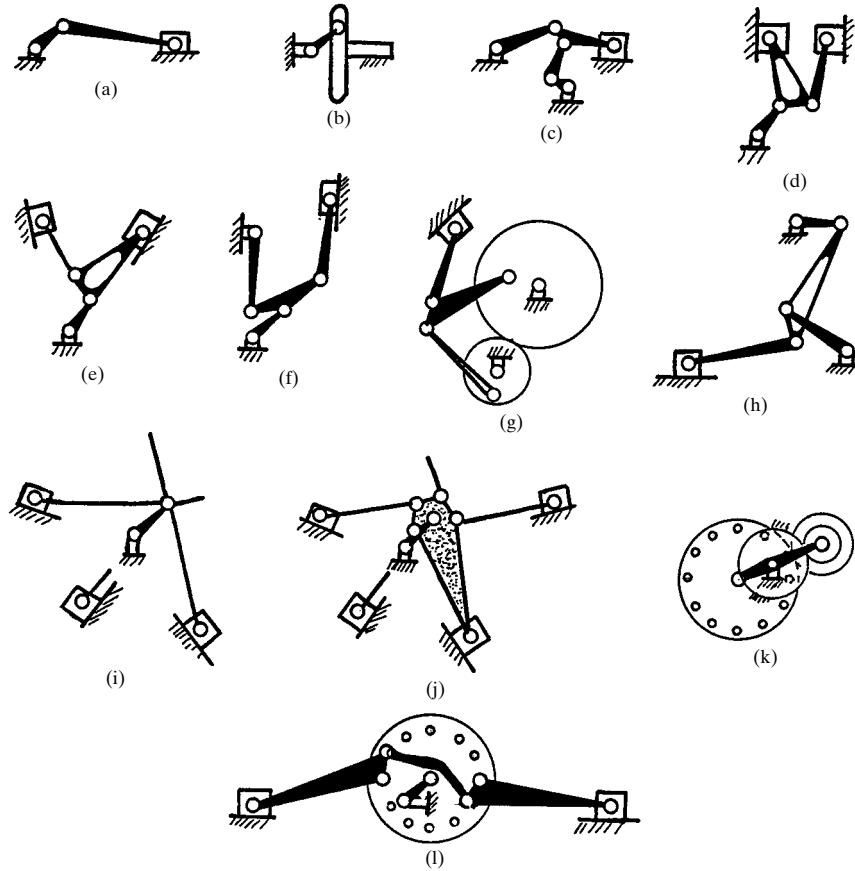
Reciprocating mechanisms I. These mechanical devices cause a member to translate on a straight line. (a) Slider crank; (b) Scotch yoke; (c) toggle mechanism; (d) Zoller engine; (e) V engine; (f) double-stroke engine; (g) geared engine; (h) Atkinson gas engine; (i) ideal radial engine; (j) practical radial engine; (k) geared Nordberg radial engine; (l) linked Nordberg radial engine.
